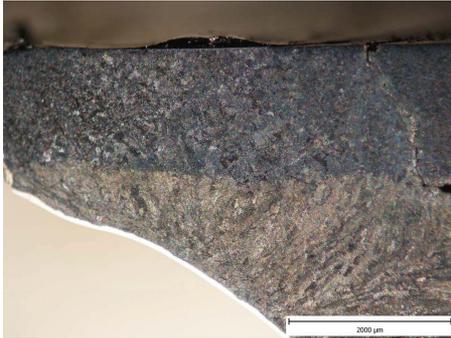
Macro view of perpendicular cut of weld.
